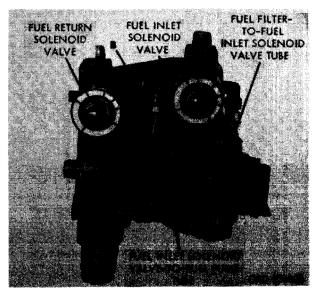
DISCONNECTING OR CON-NECTING FUEL INLET SOLENOID VALVE TUBES AND HARNESS.
